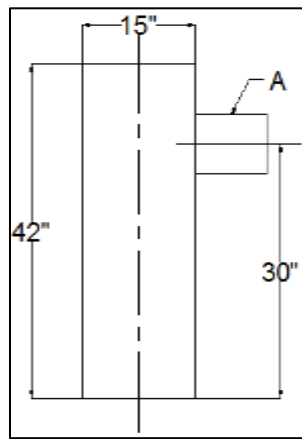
Overall dimensions of shell and nozzle with nozzle location.
